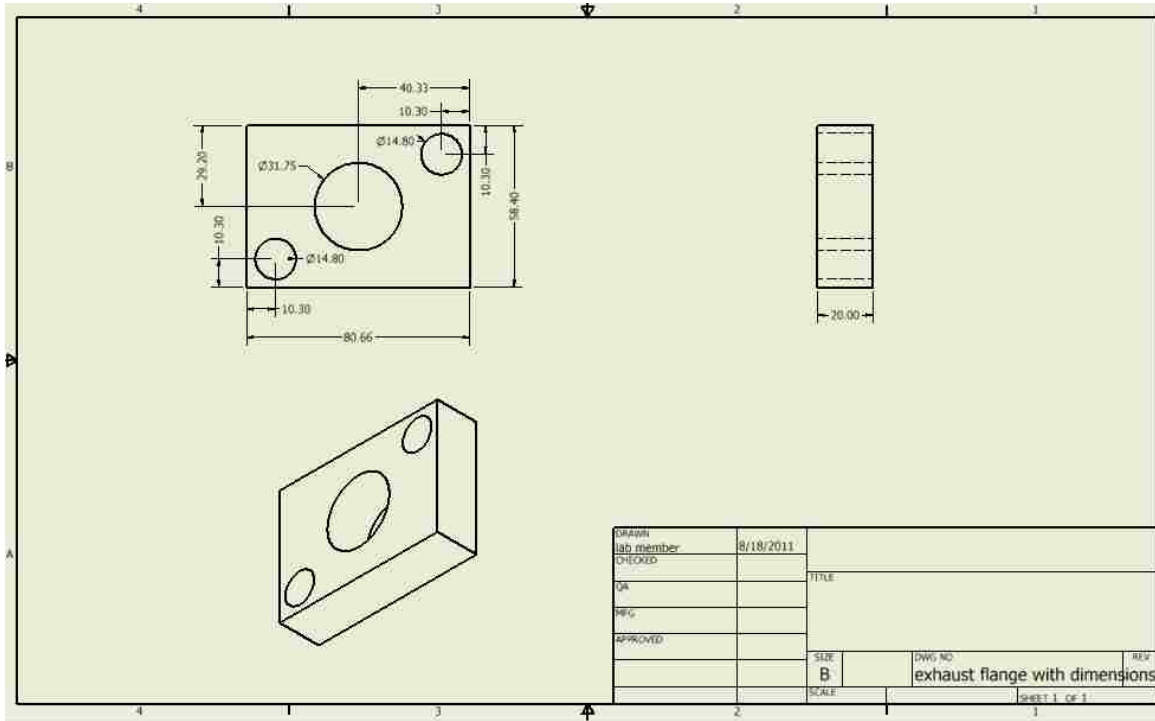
Drawing of Flange on First Cylinder Exhaust
